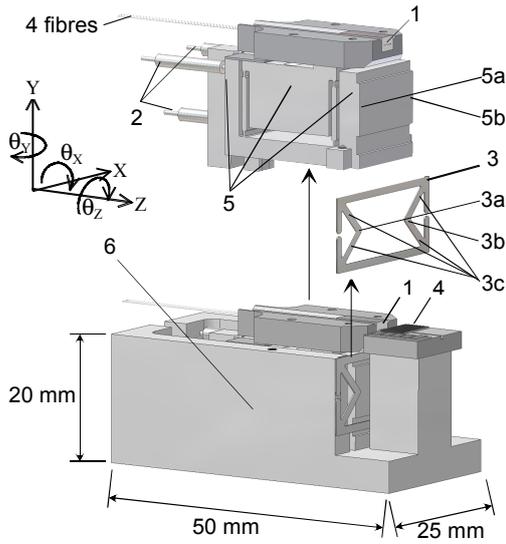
Schematic presentation of fibre to optical chip sub-assembly. Top: inner adjustable actuator part which is mounted in the “U-shaped” component (bottom) using three elastic pins (2) and after aligning with external piezo-electric actuators (not shown) permanently fixed with the tuning frame (3).
